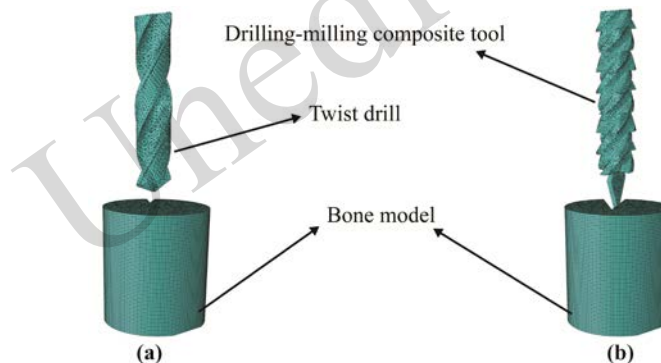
Tool grid diagram. (a) Twist drill. (b) Drill-milling tool.
